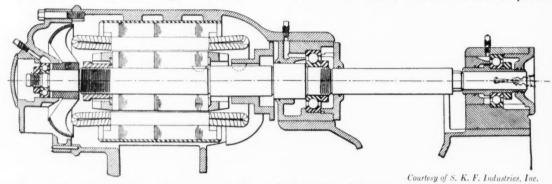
Illustrating the mounting design of a horizontal ball bearing spindle, with provision for pressure grease lubrication. This is brought about by direct application of a pressure grease gun through the fittings as shown adjacent to the ball bearings. Attention is drawn to the tightness of construction throughout, which effectively precludes entry of abrasive foreign matter, which might prove damaging to the bearings.
